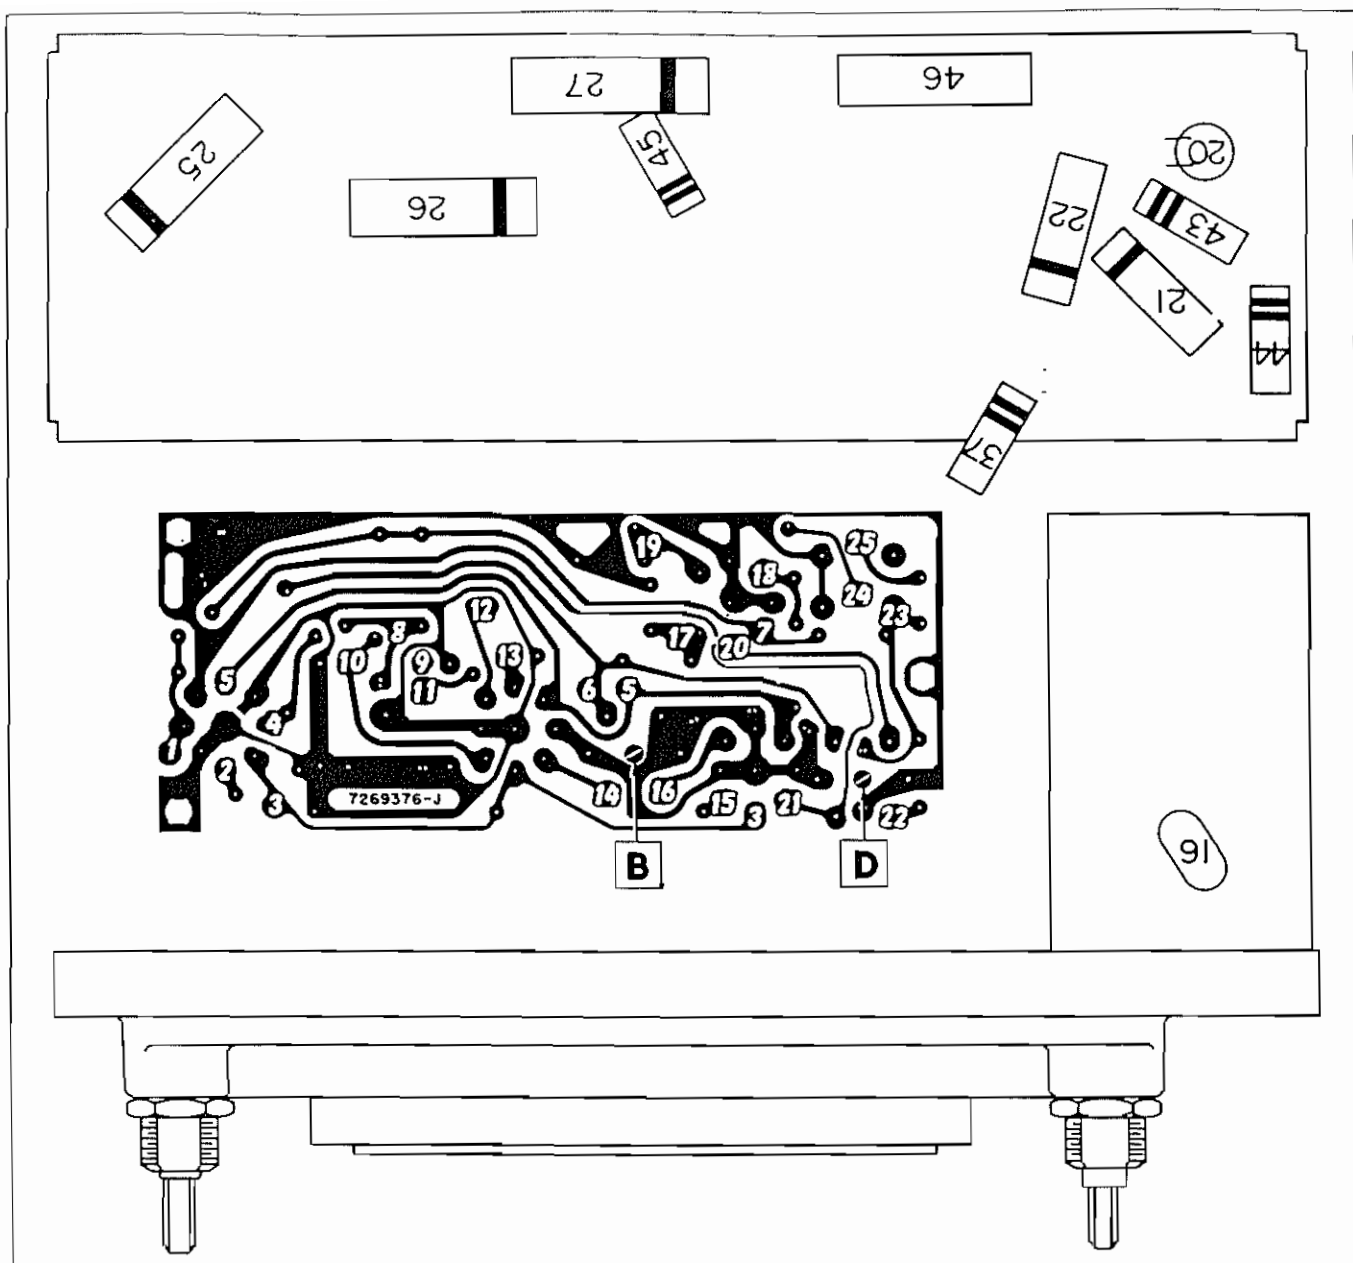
PARTS LAYOUT - BOTTOM VIEW - 987724 - RADIO
